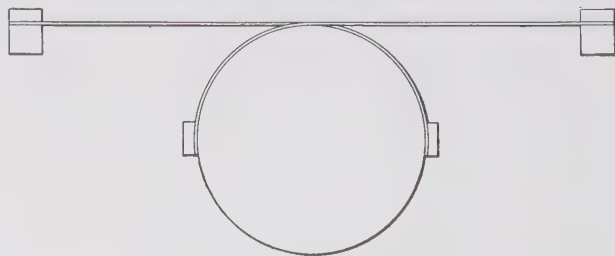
Pitch disk of the Lees-Bradner gear grinder.
